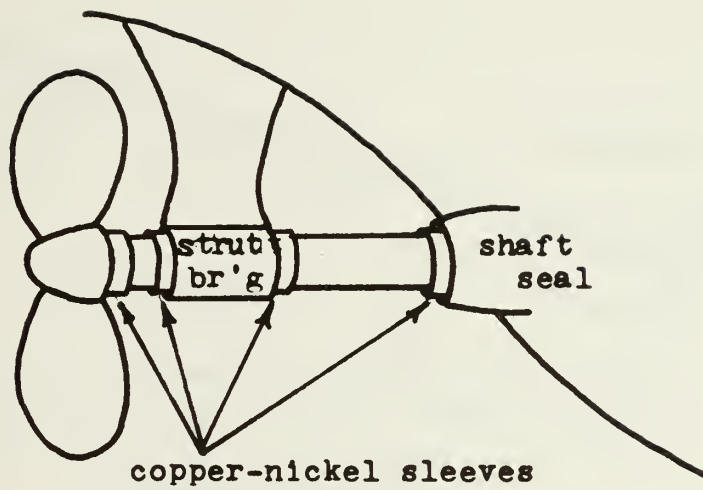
Propeller Shaft Arrangement External to the Hull.
